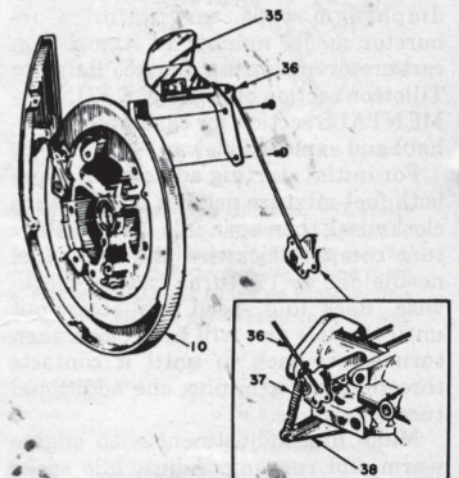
View showing Super WIZ governor installation. Refer to Fig. HL215; governor spring attaches to carburetor throttle arm hole numbered (1) and governor link attaches at hole numbered (3).
